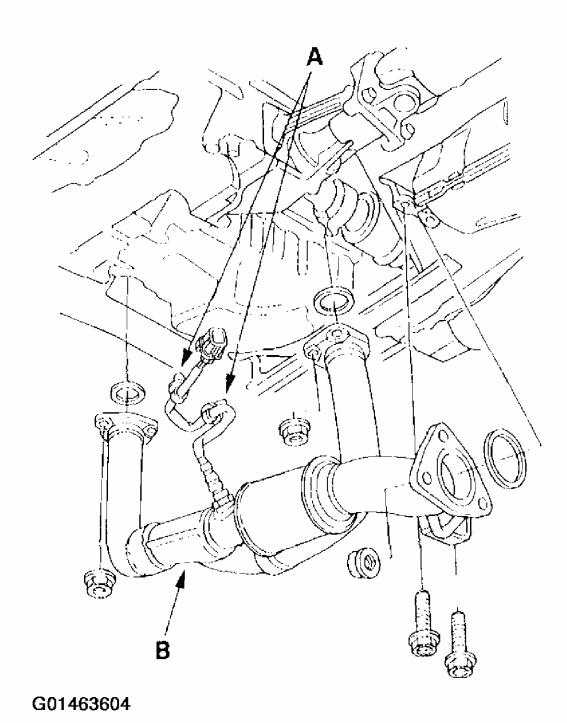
Removing The Harness Clamps & Exhaust Pipe A Courtesy of AMERICAN HONDA MOTOR CO., INC.
